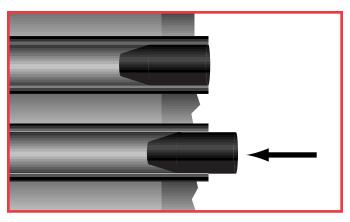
Install stoppers flush with the end of the tube when the tube extends beyond the sheet.
